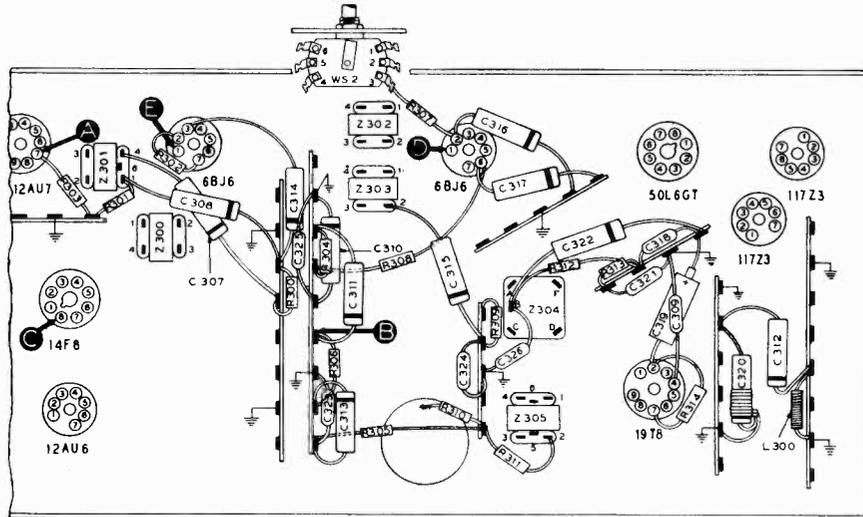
Bottom View, Showing Section 3 Test Points TP-6461
